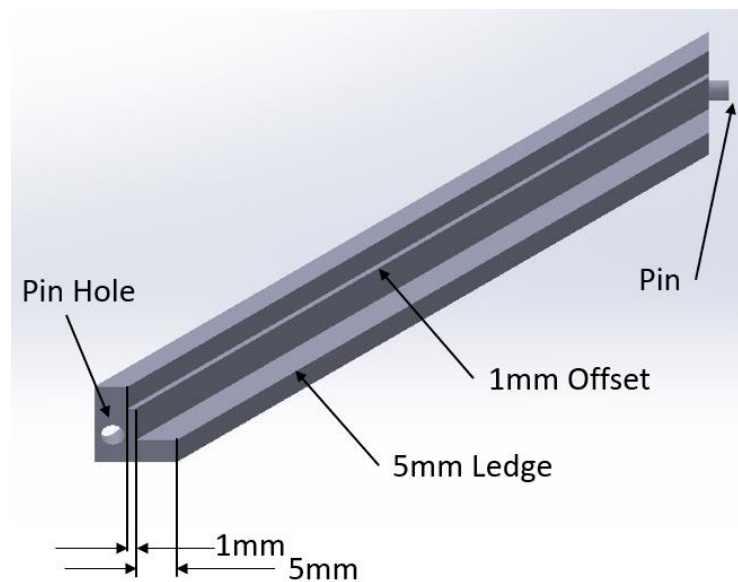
3D printed frame design. The image shows one edge of the frame. Four of these parts can be attached using the pin and the pinhole to create a square frame.
